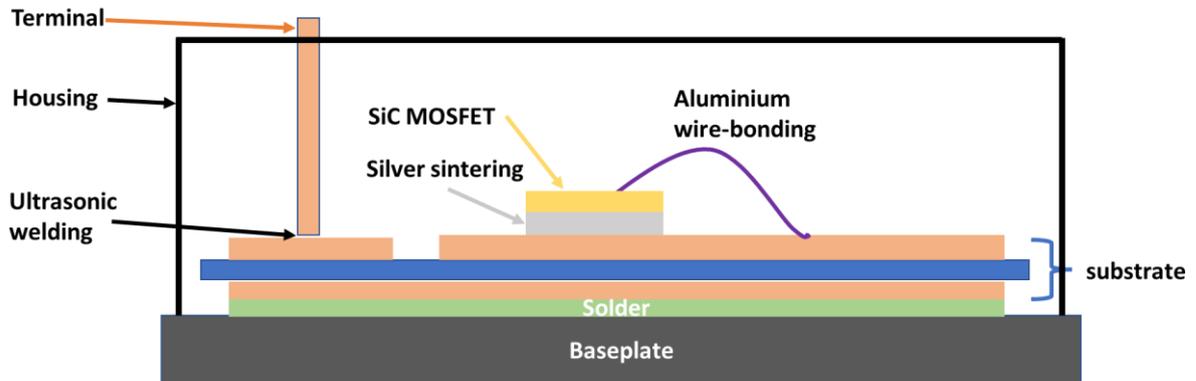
Schematic cross-section of the LinPak demonstrator. The dimensions are not to scale.
